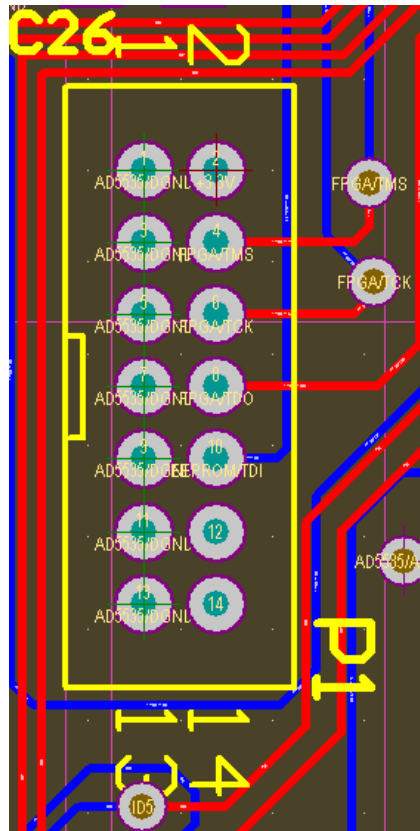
Close-up CAD drawing of the JTAG header on the control board
